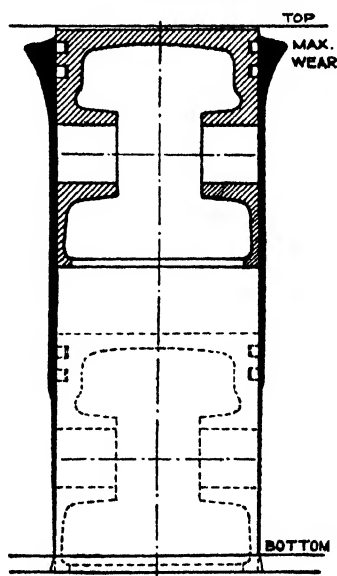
Showing manner in which the Cylinder wears. Position of Piston at Bottom of its Stroke is shown Dotted.
